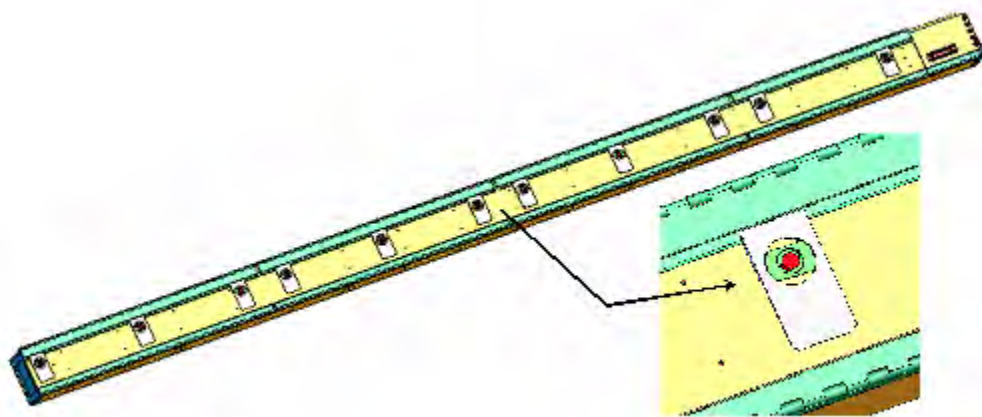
Clamshell Closure Latches and Keeper Bolts
